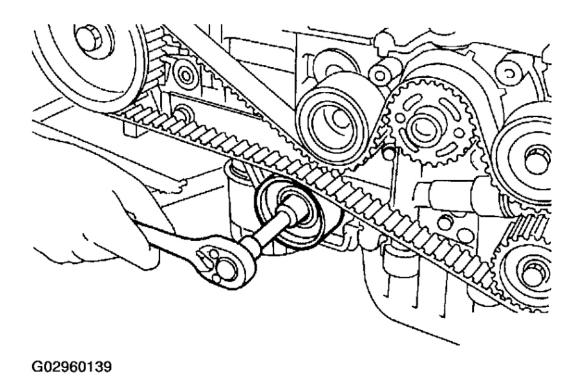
Removing Belt Idler No. 2 Courtesy of SUBARU OF AMERICA, INC.
